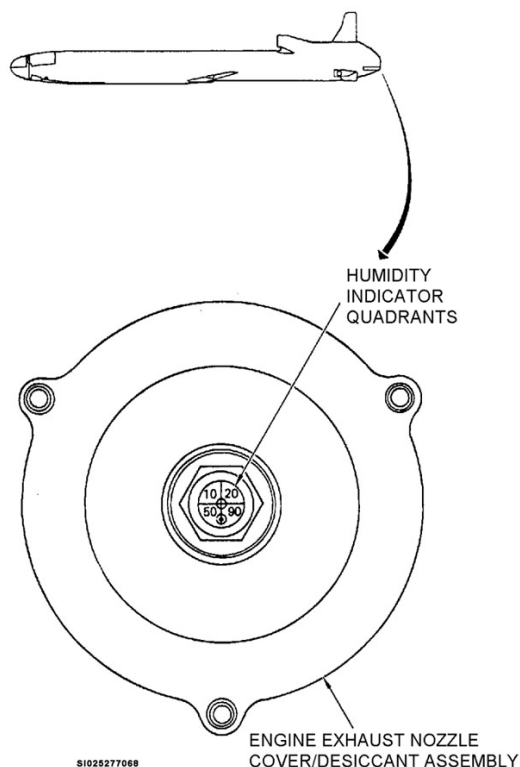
Engine exhaust nozzle cover/desiccant assembly.
